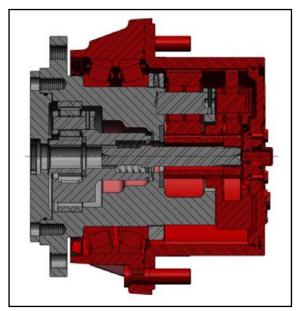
Rotating parts identified during mechanical disengagement of the drive (towing).
